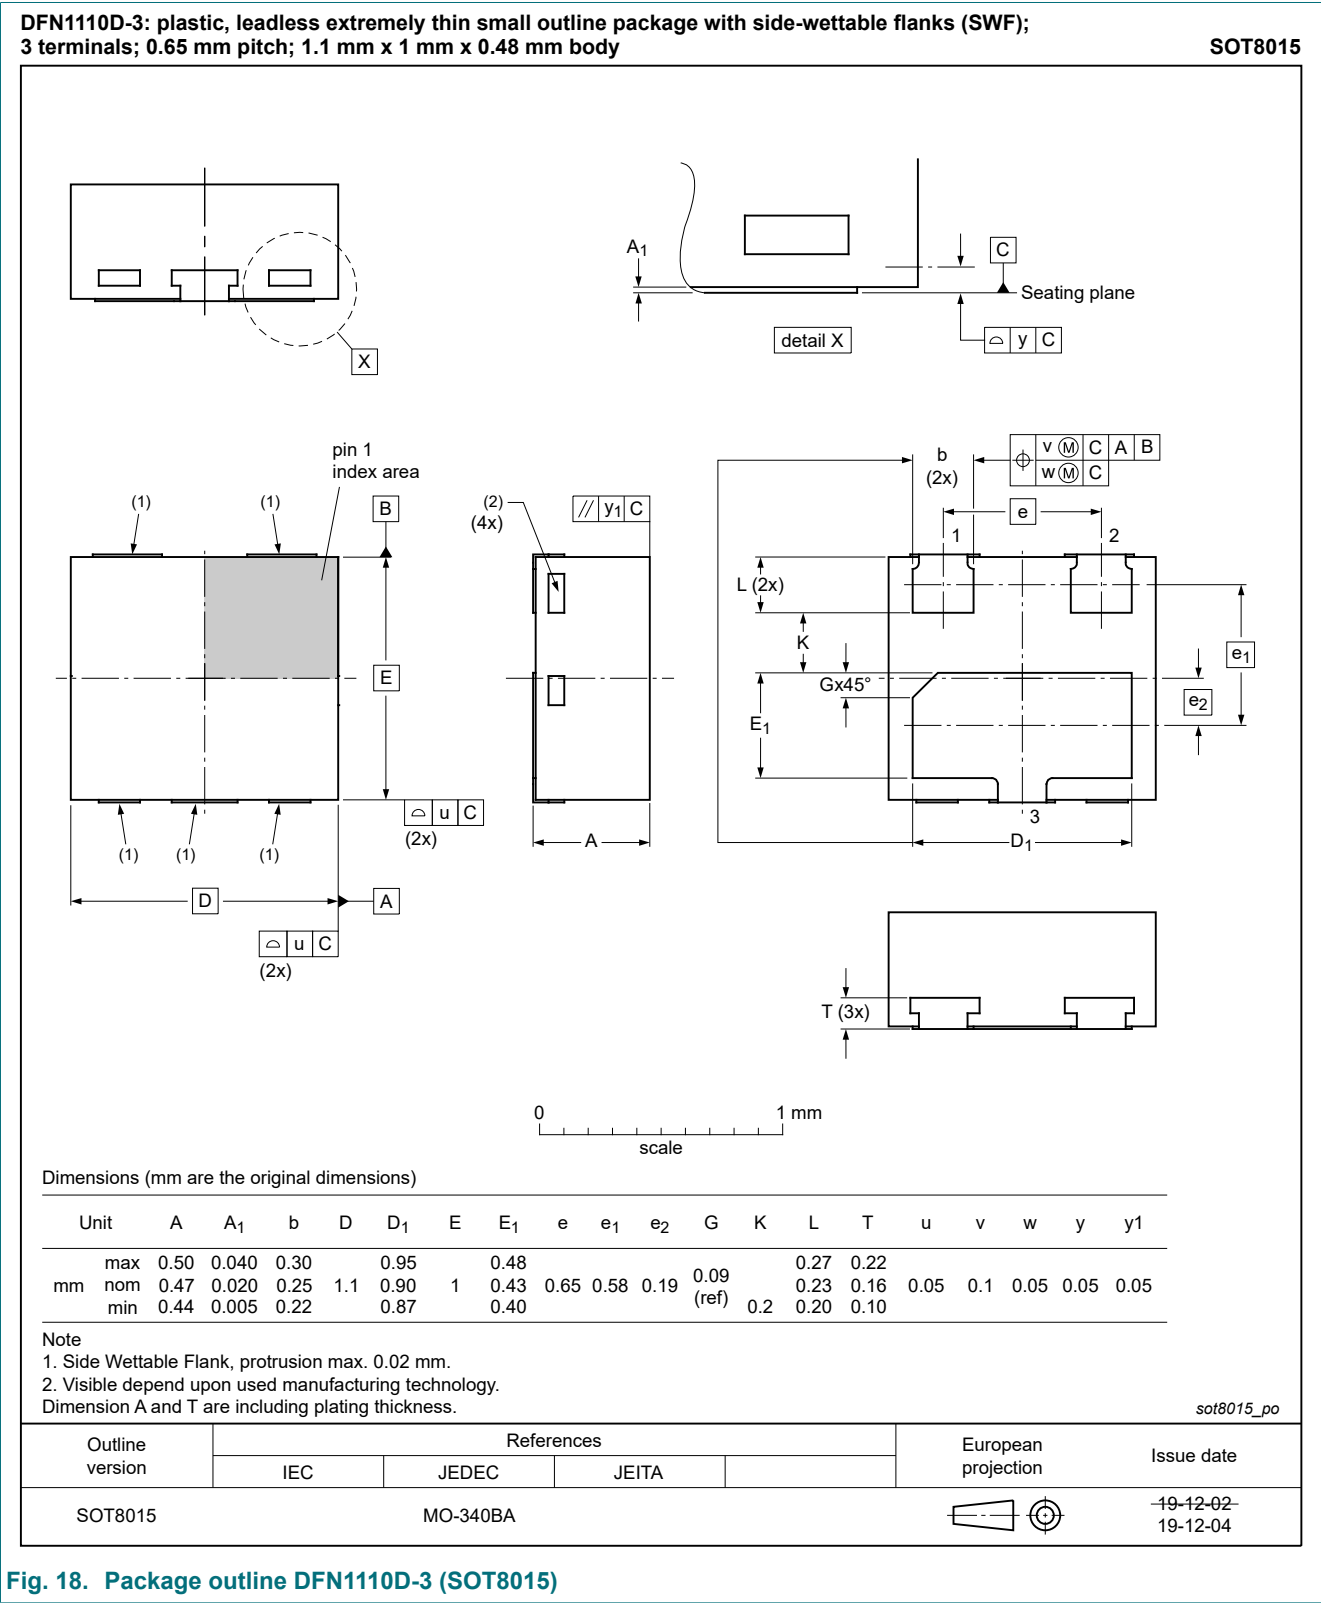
Package outline DFN1110D-3 (SOT8015)
